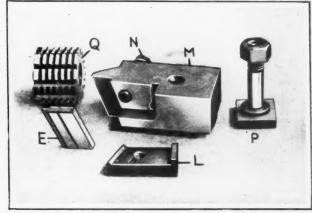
Finished Threading Hob and Disassembled Tool-holder
